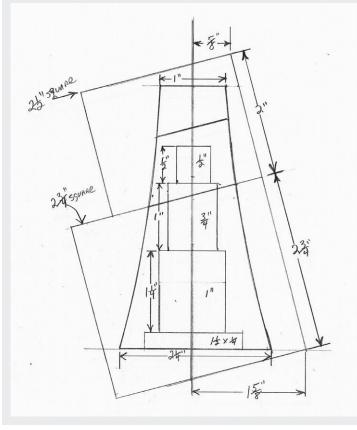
The author's preliminary sketch, showing block sizes, shaker shape, and interior drilling specs.
